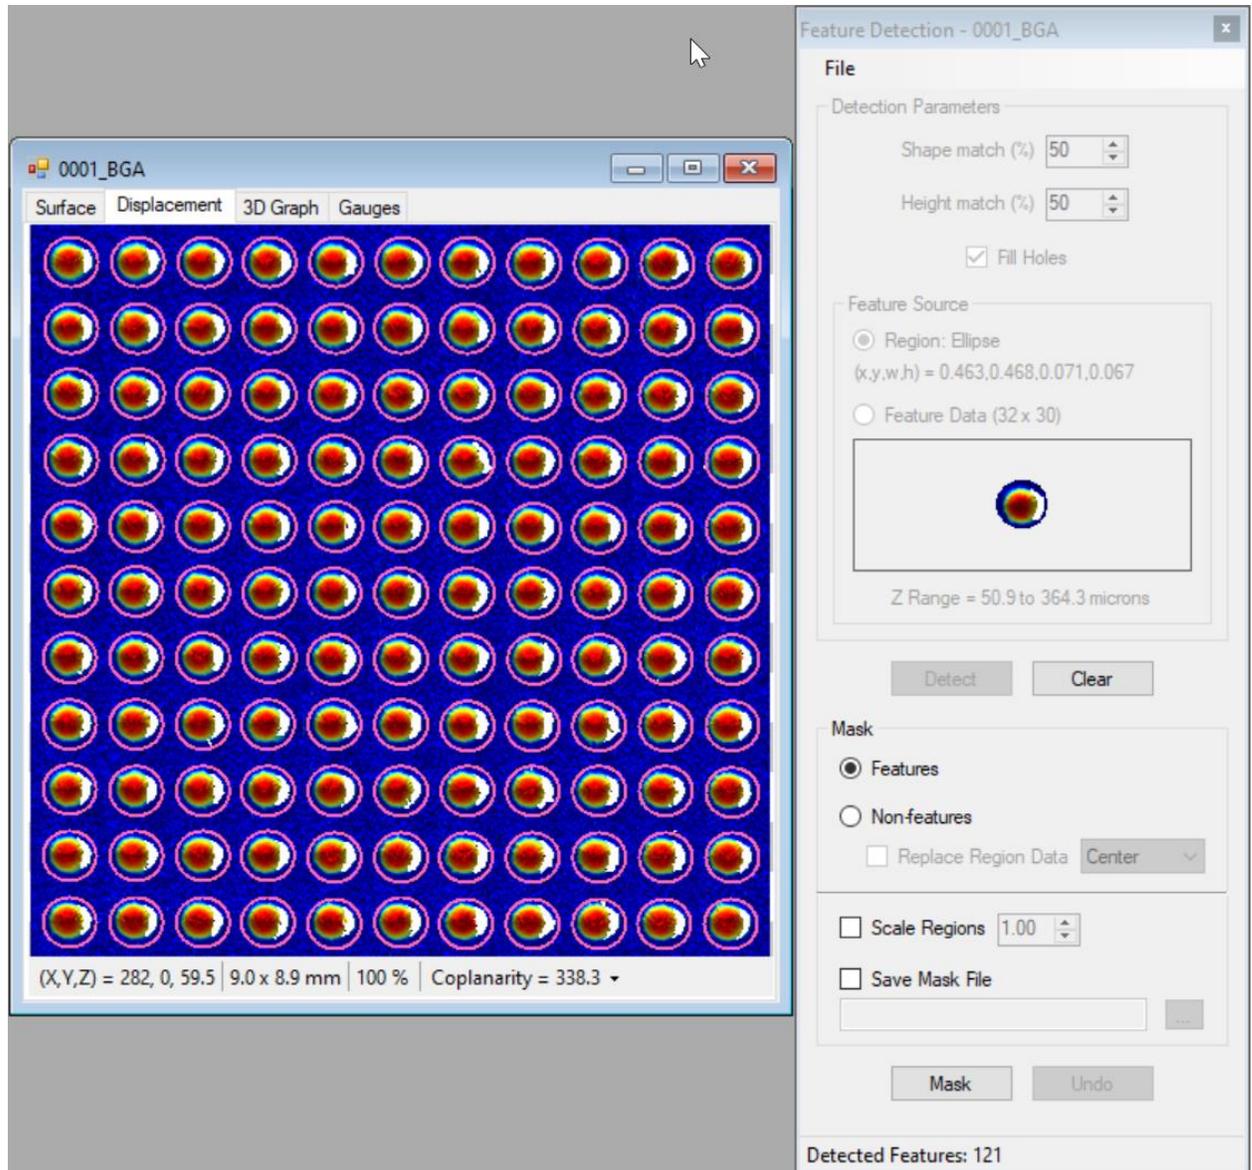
Feature Detection with Fill Holes – Solder Ball Peaks on BGA
